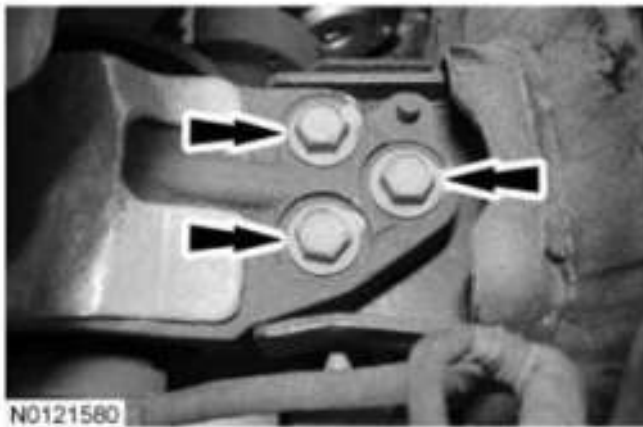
Locating Engine Support Insulator Mounting Bolts
